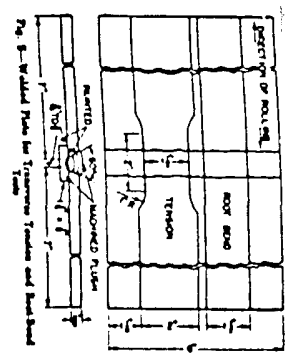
Welded Plate for Transverse Tension and Shear Tests
